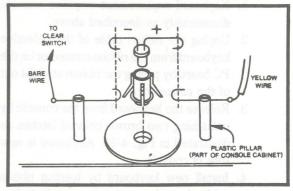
Proper formation of LED leads before soldering it into place.
